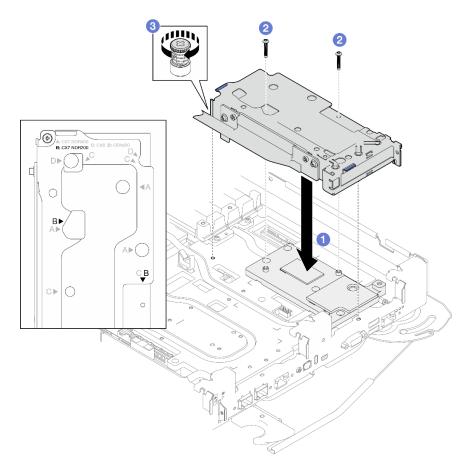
Installing ConnectX-7 NDR 200 riser assembly
